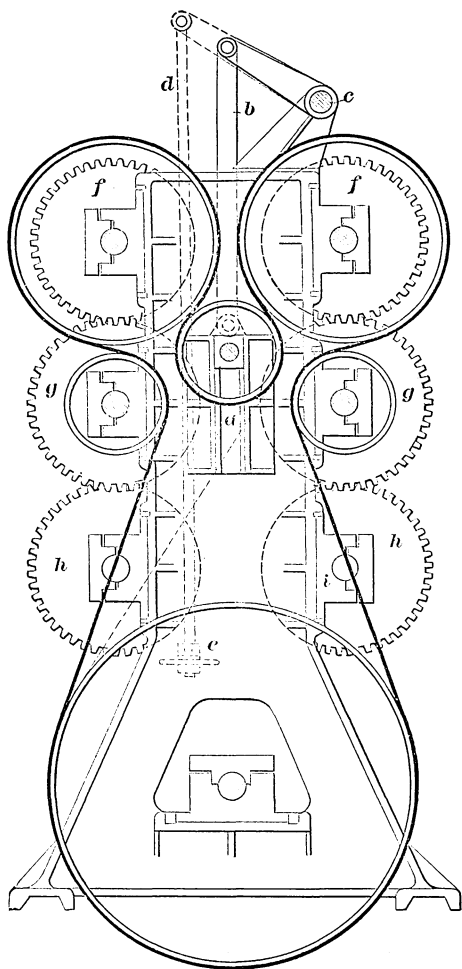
Arrangement of Gearing to Drive Vertical Rolls.
